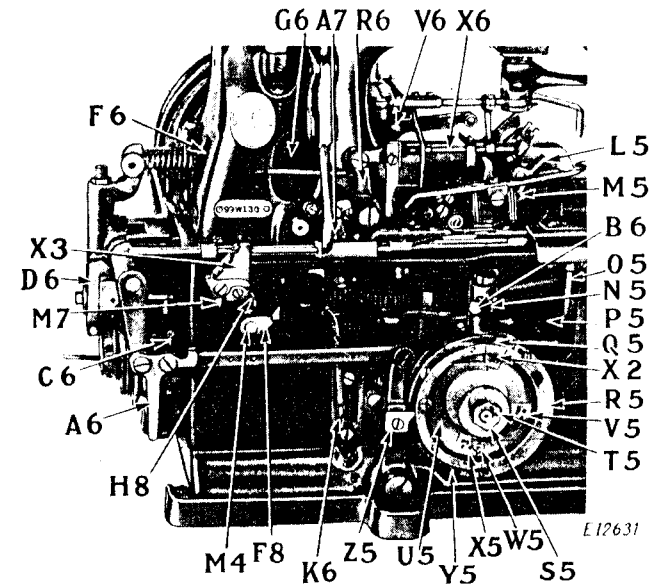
"X-Ray" View of Pattern Wheel Showing Tripping Points and Sewing Up First Side of Buttonhole
